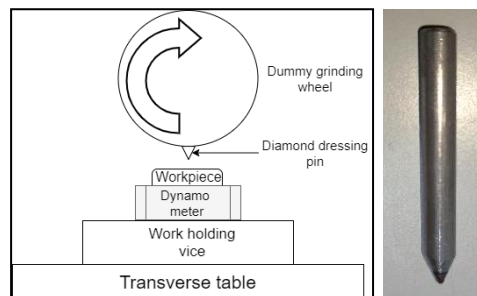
a) Schematics of the single grit scratch, b) Fabricated diamond dresser
